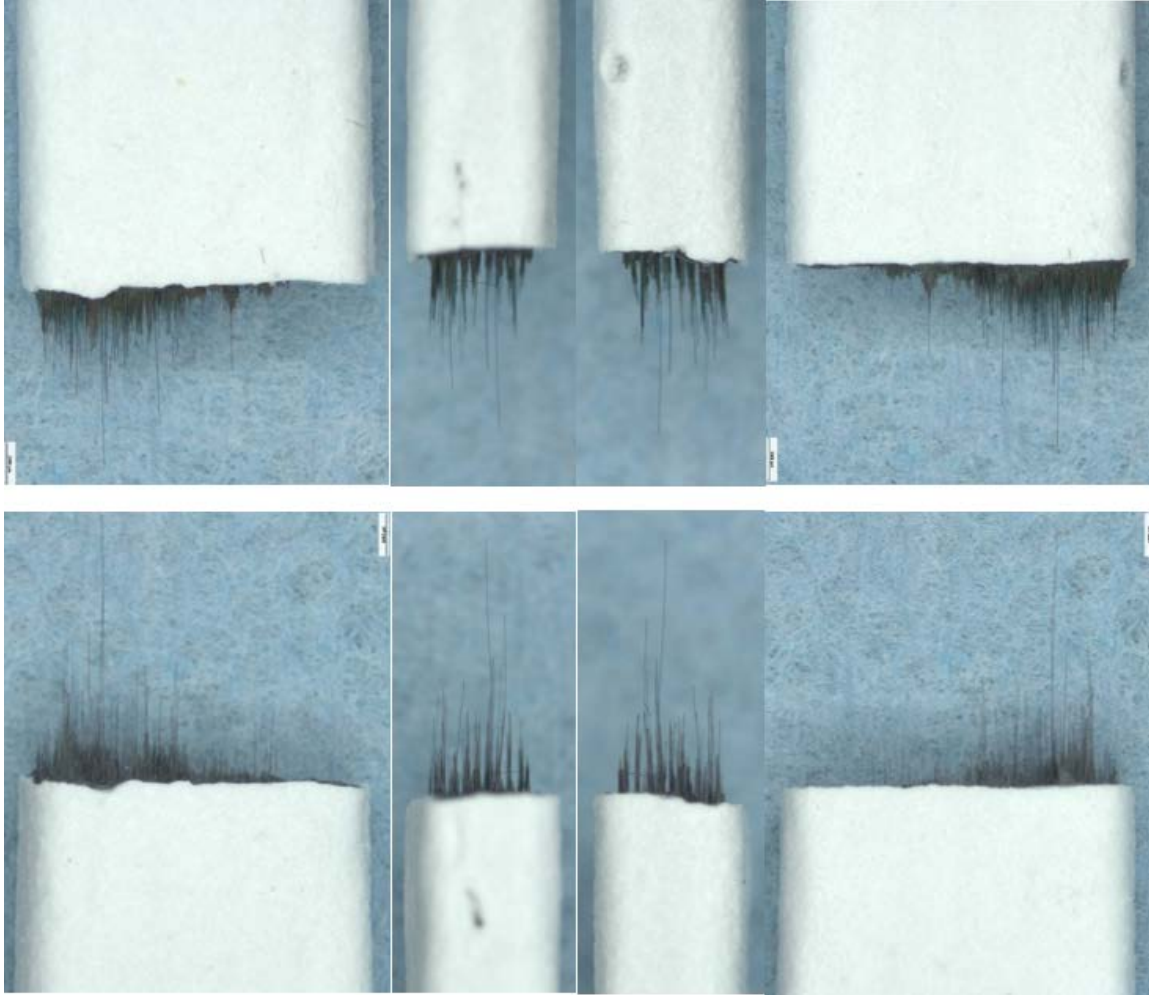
Fracture surfaces of specimen P15004-8, tested in fatigue at 1200°C in air.
